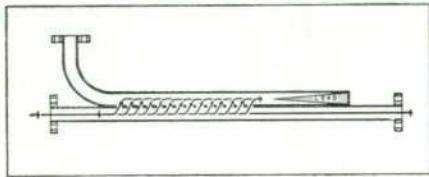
Cross-sectional drawing of *-bp-* multi-hole coupler.
